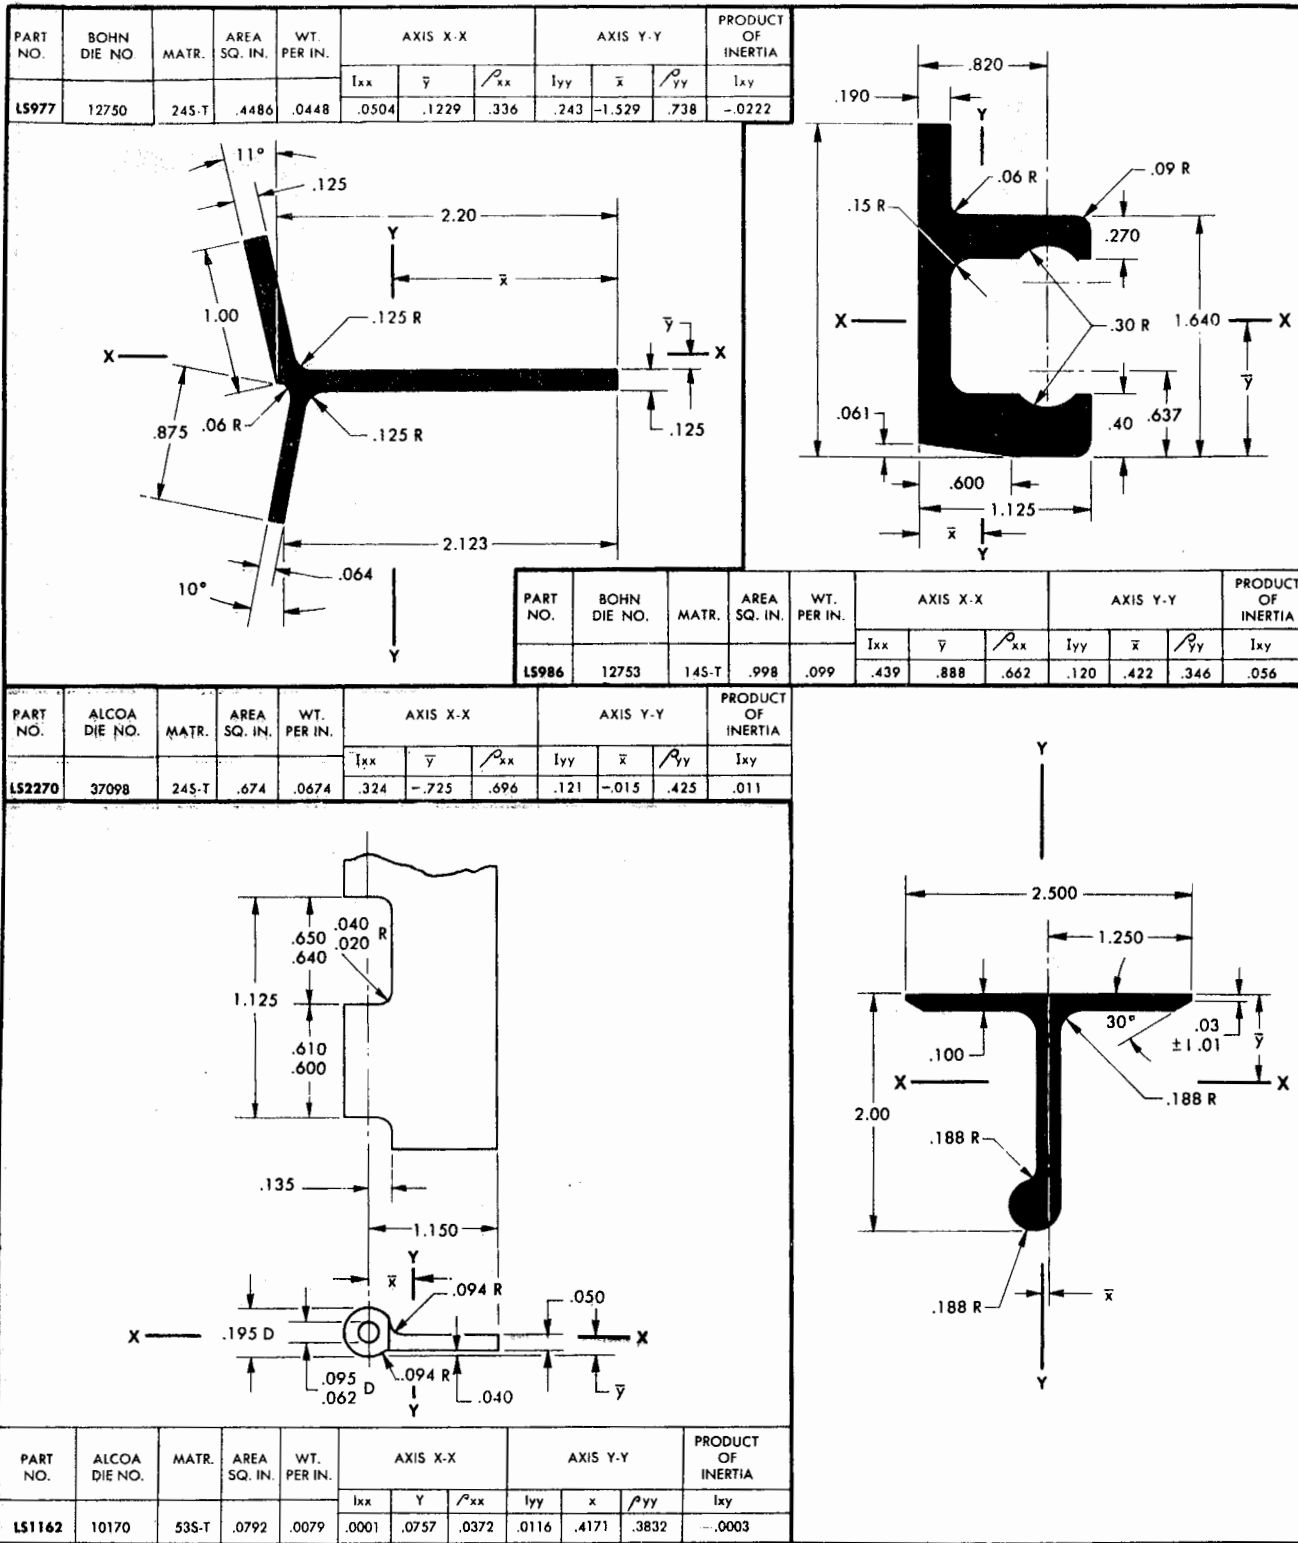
(Sheet 9 of 17 Sheets) — Extruded Standards
